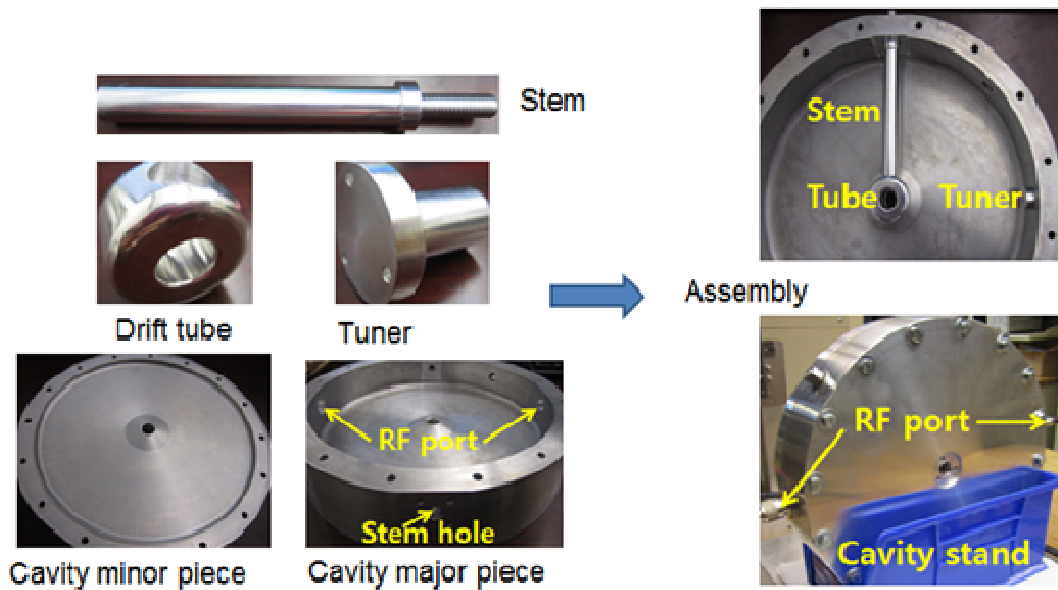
Fabricated double gap rebuncher cavity and assembly.
